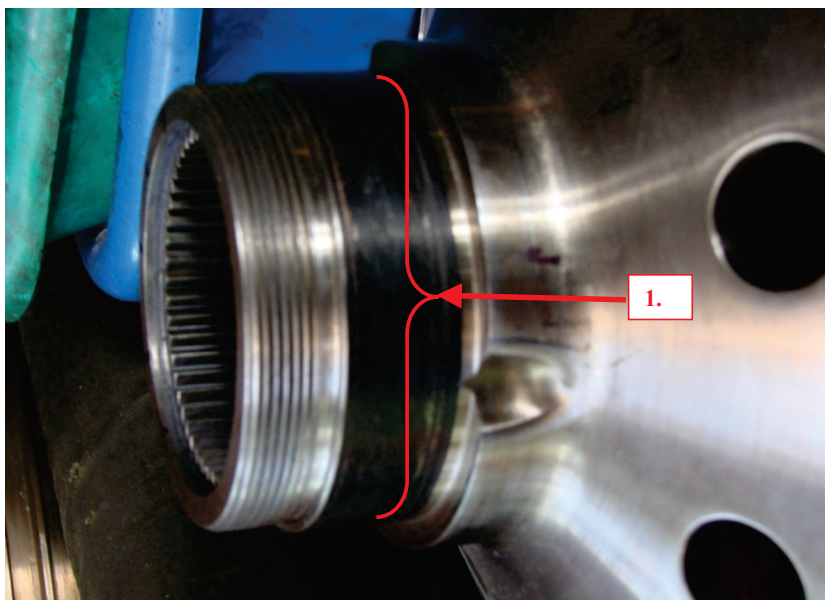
Single-shaft turbo-jet engine bearing journal after prolonged key fit between a rolling bearing inner ring and a journal: 1 – trace (canker) on the journal surface after fit (interference fit) rupture and removal of the rolling bearing inner ring
